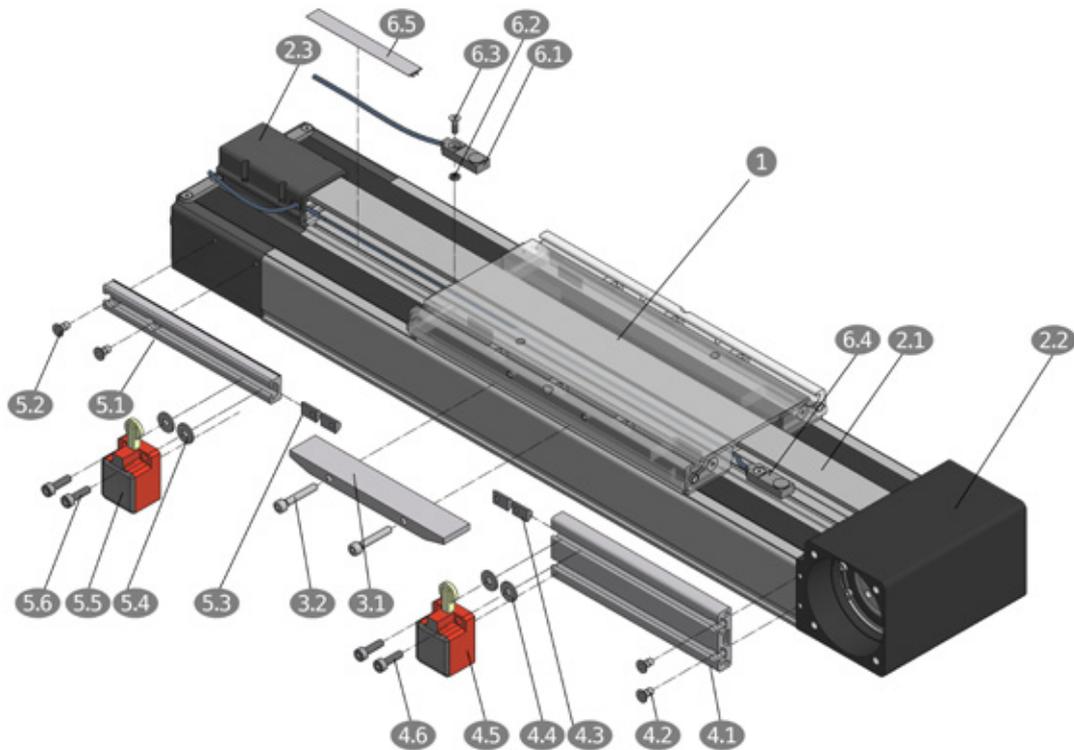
Mounting of limit switches on linear axis AXE110Z
